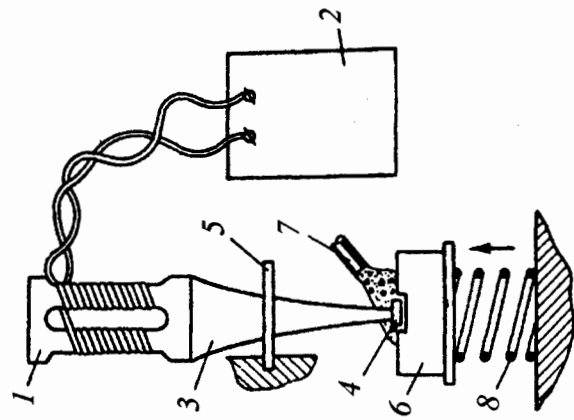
Schematic representation of an ultrasonic tool for abrasive machining [88]: (1) electroacoustic transducer, (2) ultrasonic generator, (3) horn, (4) instrument, (5) vibratory system fixture, (6) workpiece, (7) abrasive slurry feeder, (8) pressing arrangement.
